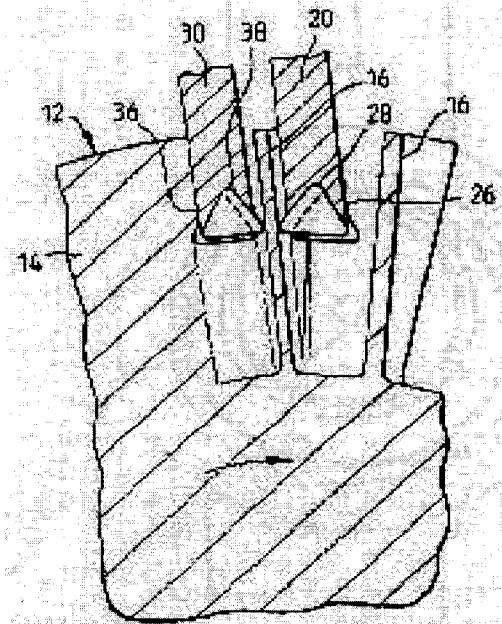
The position of the two annular cutters for machining the convex and concave surfaces of an airfoil blade [Hunt, 1994]
